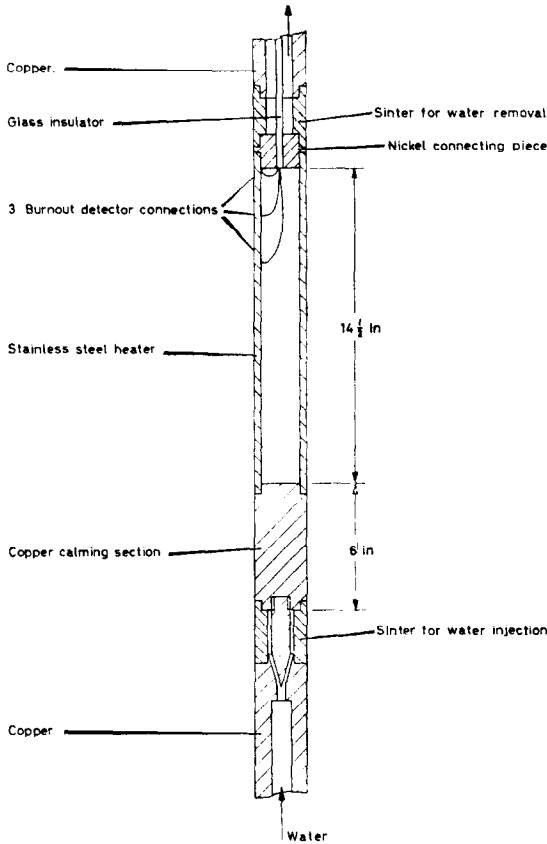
Test section core rod. (Mounted concentric with 0.866 in i.d. glass flow tube.)
